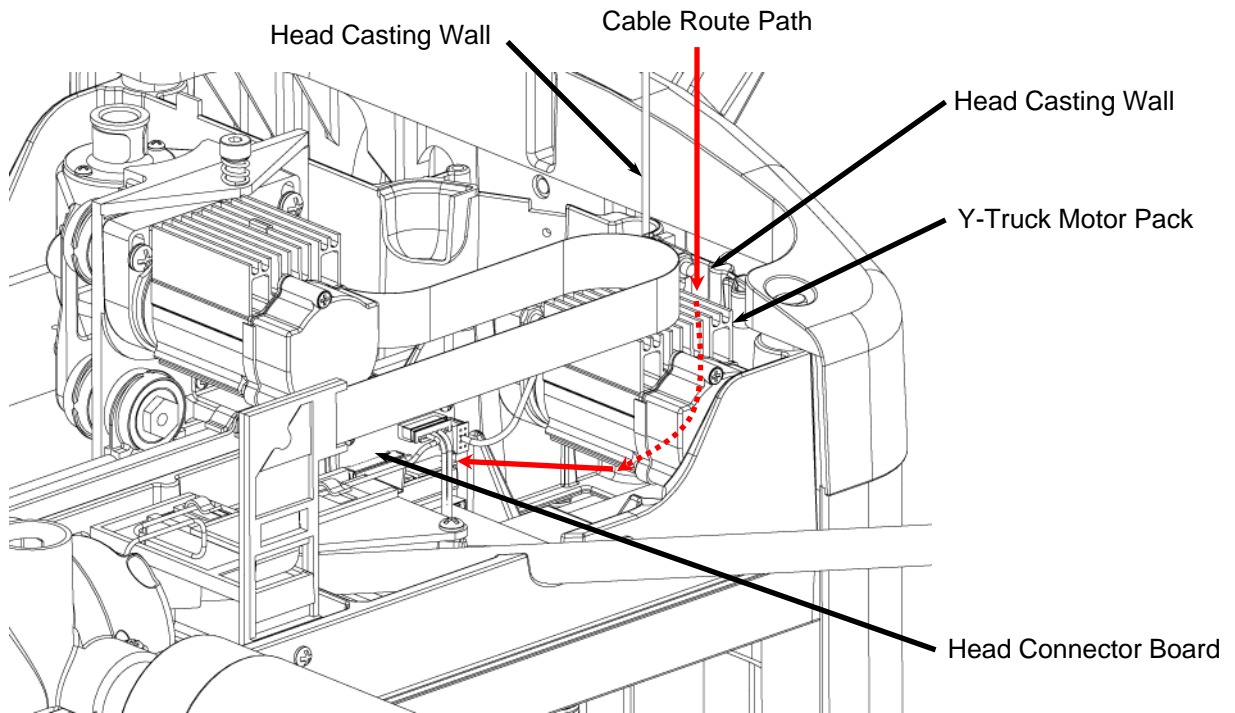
ROUTING THE HEAD CABLE HARNESS
